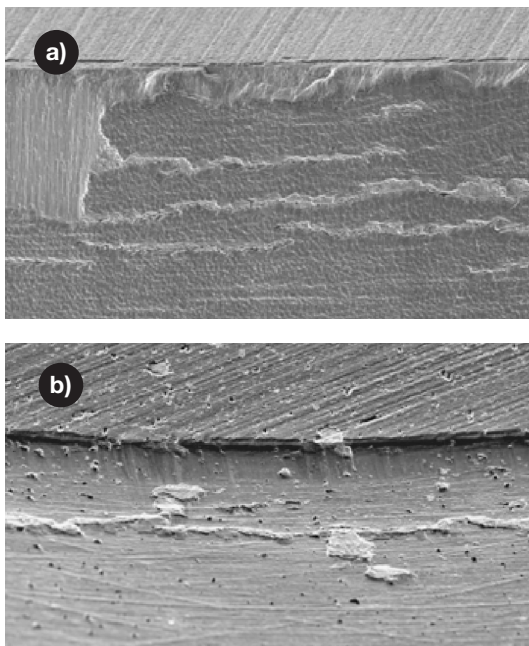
Typical tool wear of an uncoated blanking edge after 100 000 parts produced in CR 1400T-MS.
